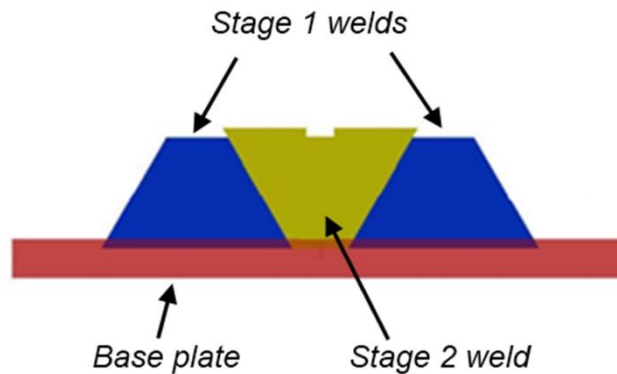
Manufacturing process of the keystone weld (Courtesy of TWI and The Boeing Company)⁹⁶.
